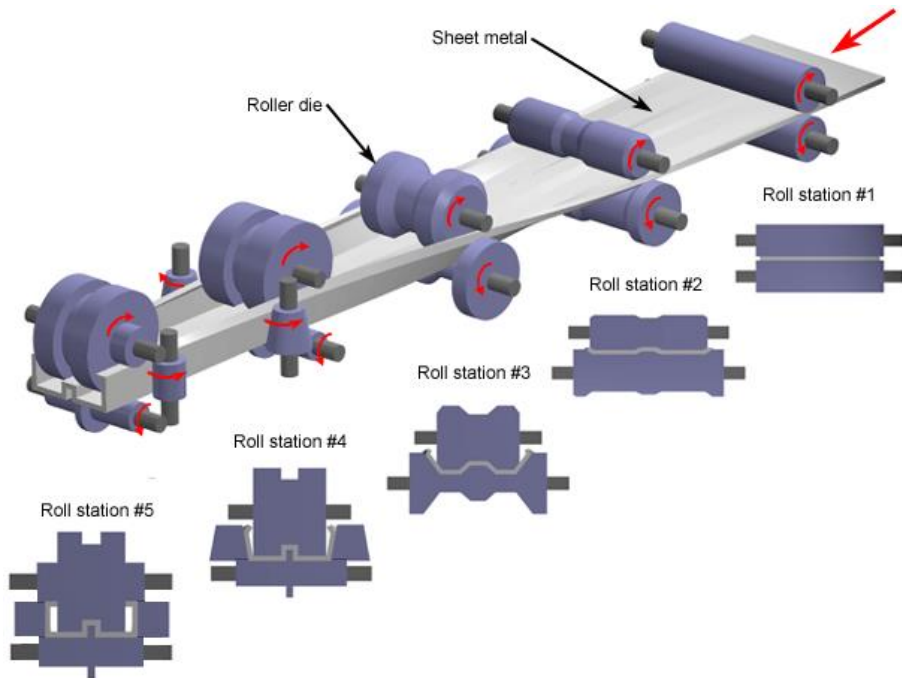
Progressive forming of a sheet metal using roll forming process [23]
